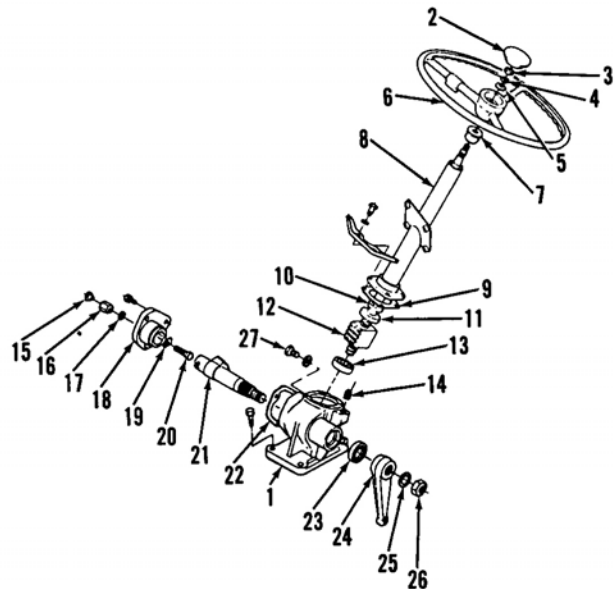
Exploded view of recirculating ball nut steering gear used on all models.
